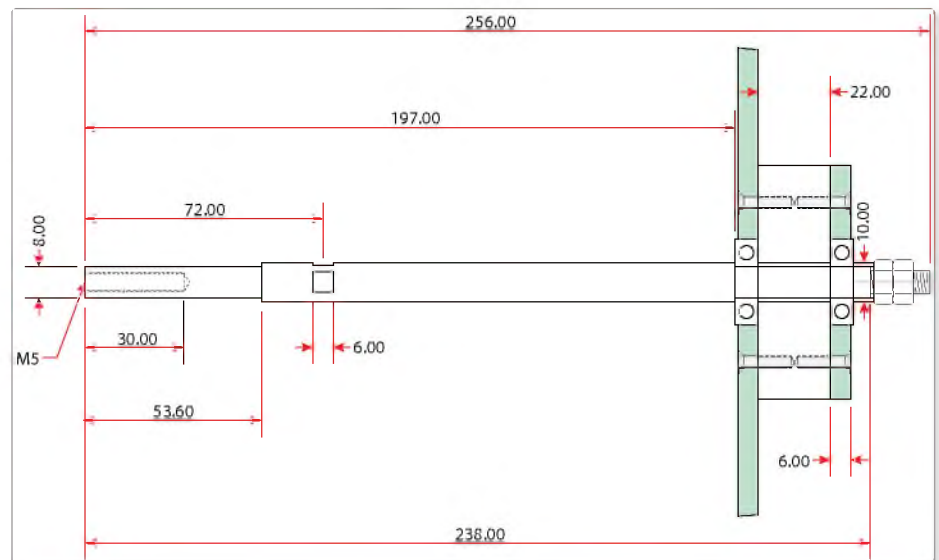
Manufacturing drawing for the Wyvern extension shaft (courtesy of Kevin Trott). This shaft replaces the standard shaft fitted to the Turnigy ROTOMAX 50 cc electric motor
